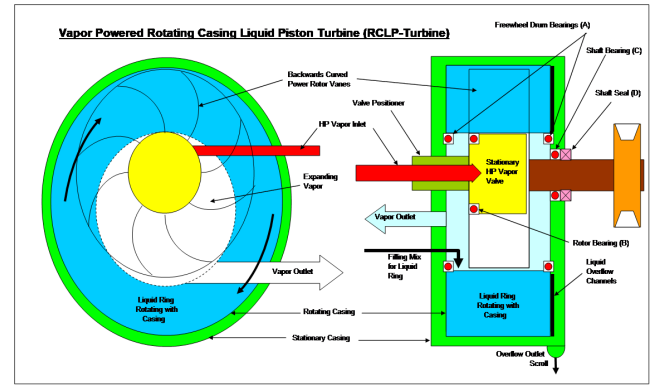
Vapor powered rotating casing piston turbine (RCLP-Turbine).
